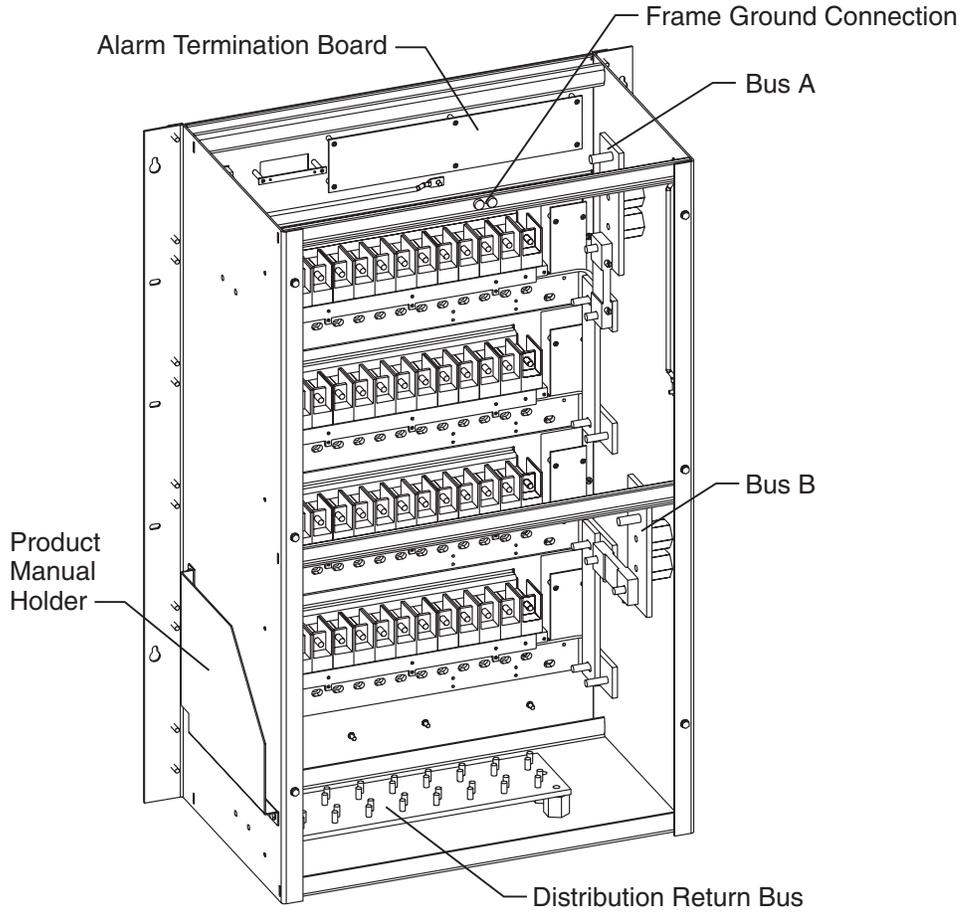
Rear View of Mini-Distribution Bay and A/B Load Connections (four fuse panels shown)
